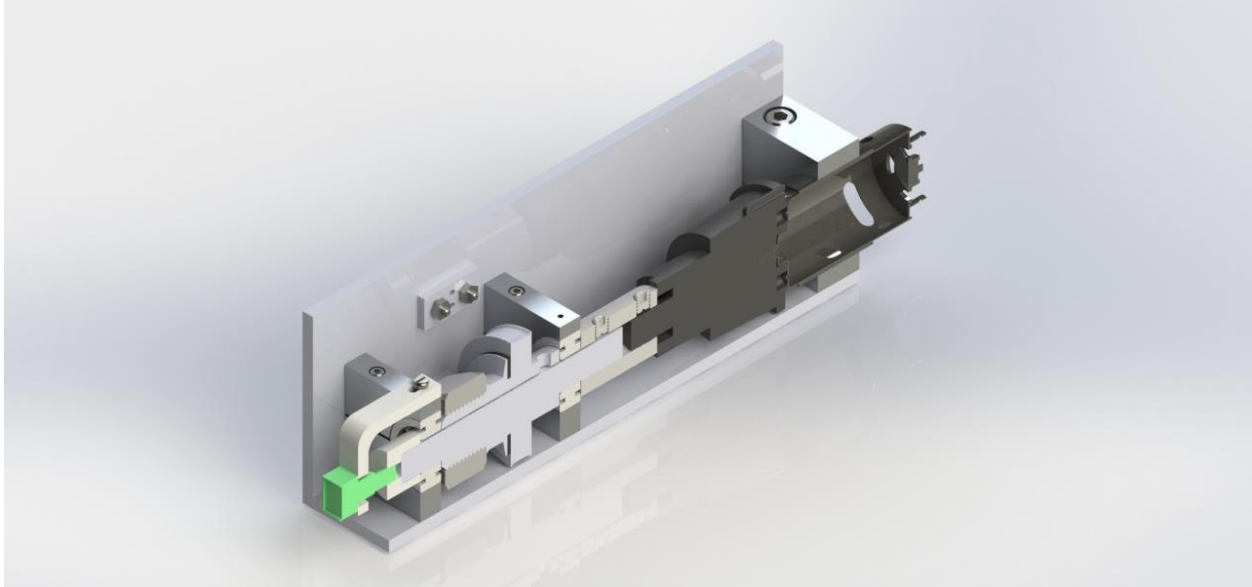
Elbow Motor Housing Revision 4 (Section View)
